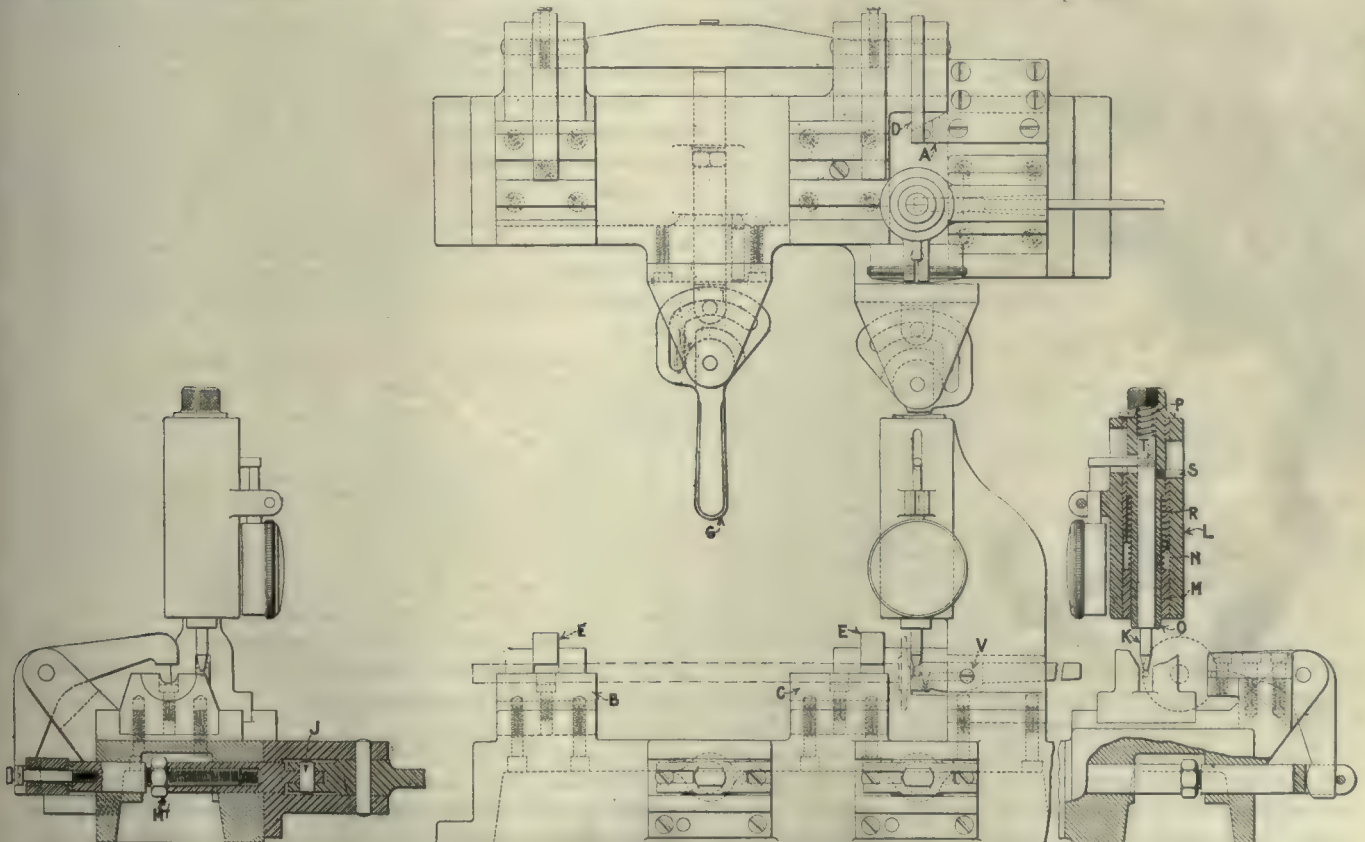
DETAILS OF COMBINATION GAGE AND ADJUSTING FIXTURE
